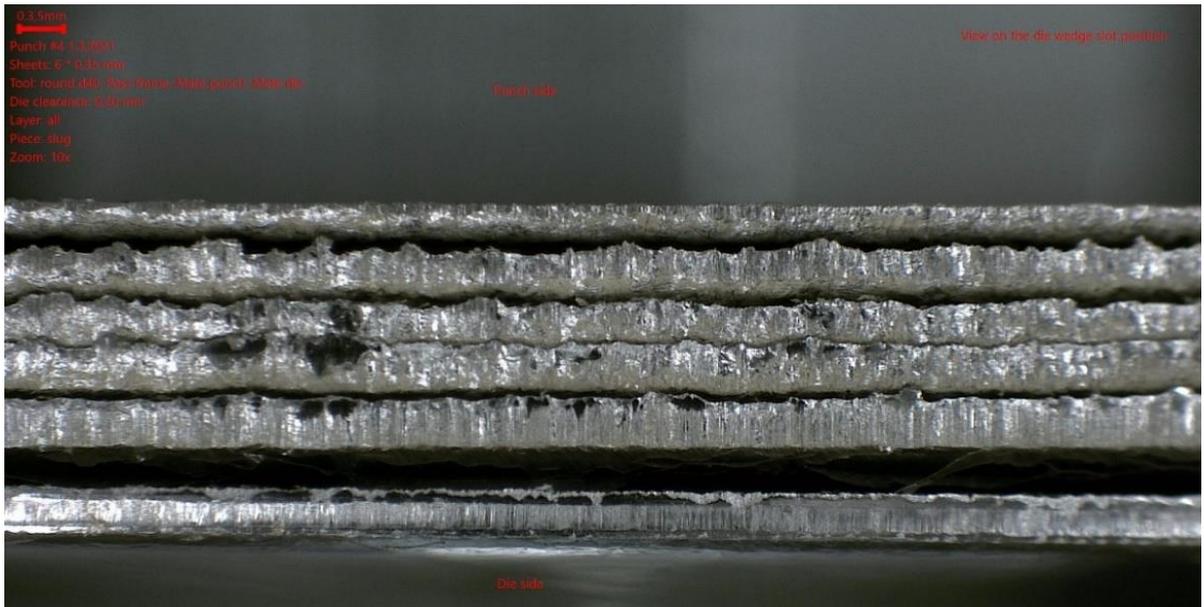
Stack of six M270-35A sheets, die clearance of 0.20 mm. Material transfer is still present. The burrs on layers 2 – 4 tend to turn into the rollover zone of the upper sheets. Bottom layer flaking not so visible. Burrs on the top layer felt worse than with clearances of 0.04 mm and 0.40 mm.
